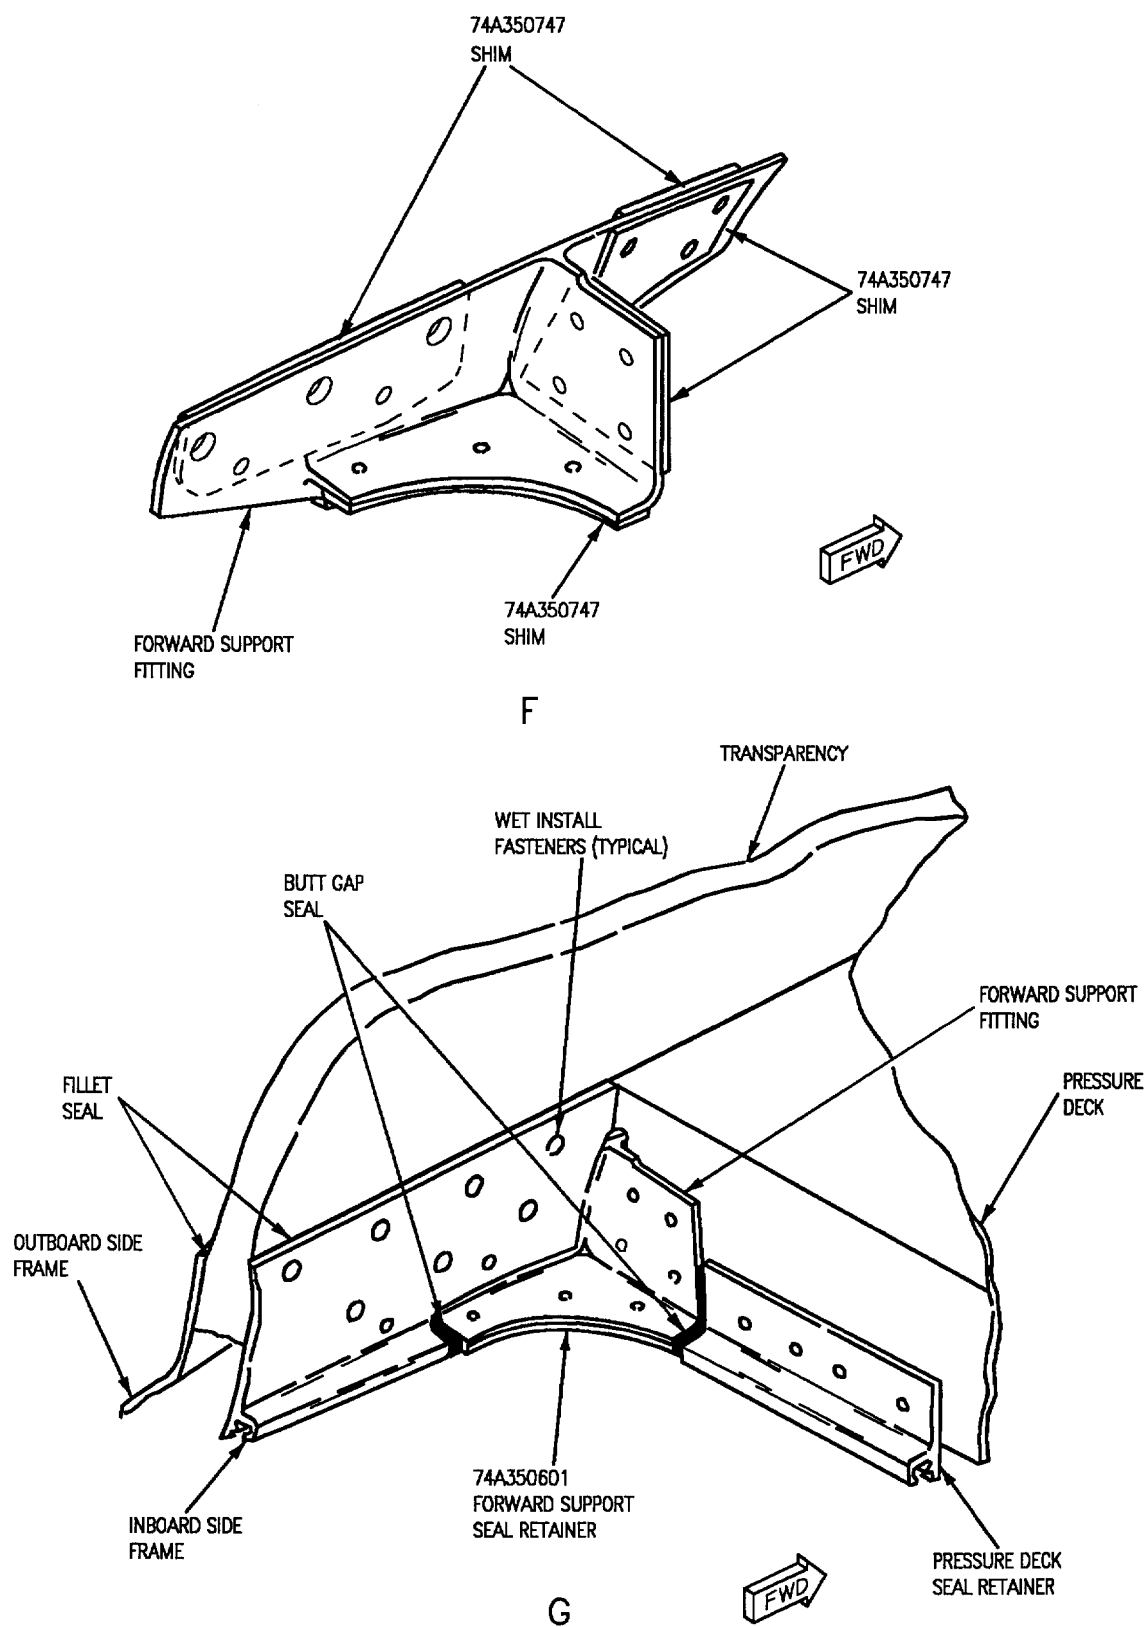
Inspection or Replacement - Forward Support Fitting (Sheet 4)
